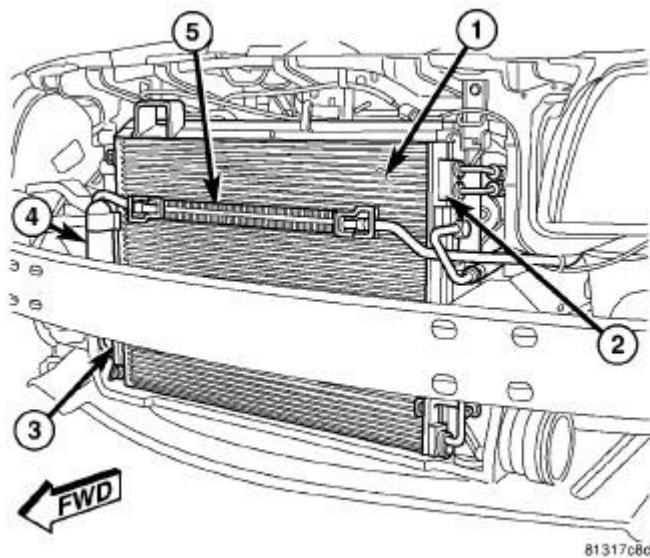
Identifying A/C Condenser & Power Steering Cooler
